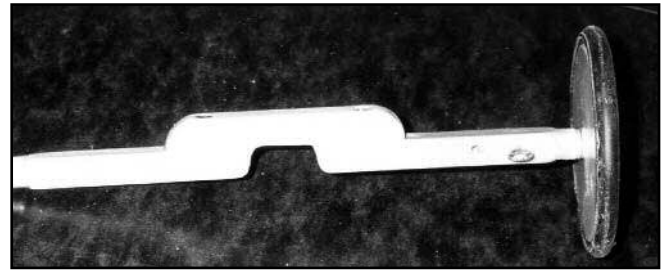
A "U" placed in the idler wheel axle to prevent contact with the center connecting rod.
